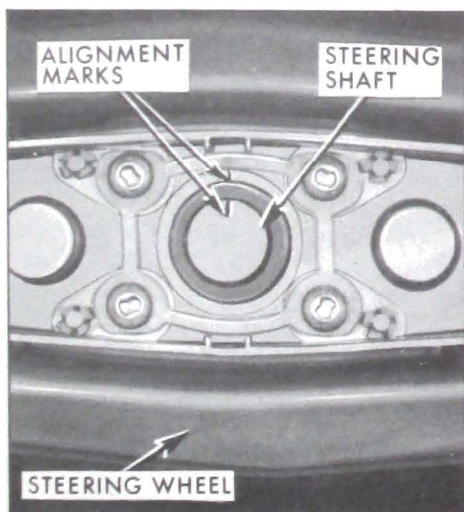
Steering Wheel and Shaft Alignment Marks
